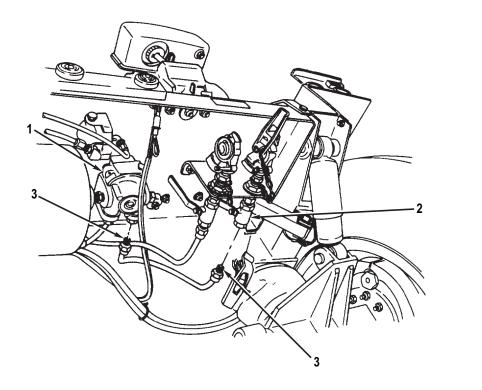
Booster Relay Valve-to-Service Shutoff Valve Tube Assembly Replacement.
